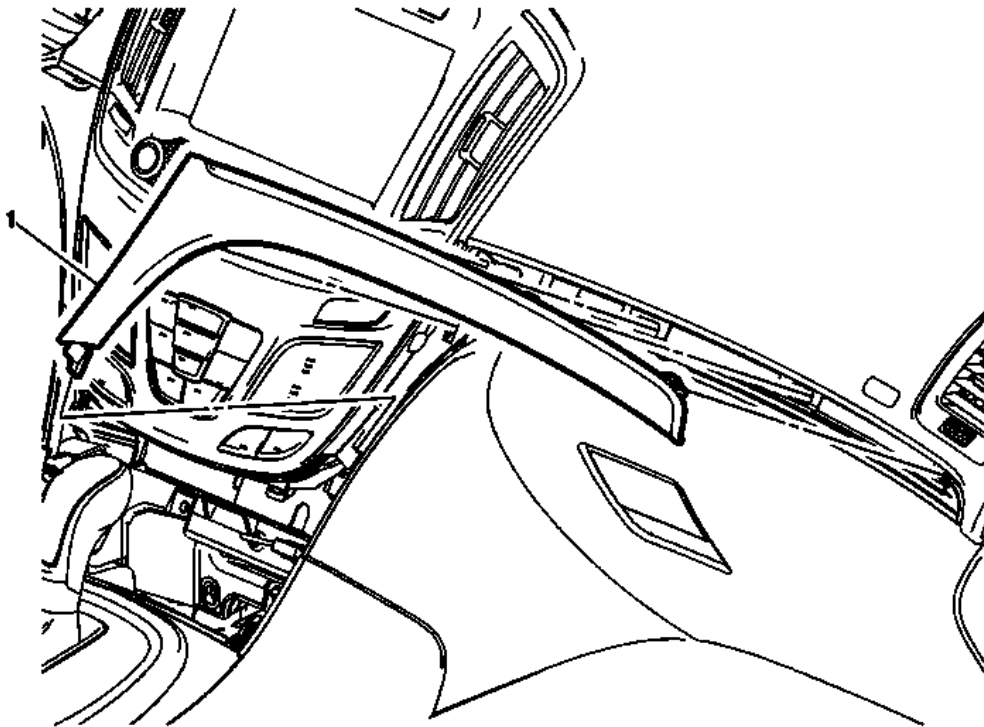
Instrument Panel Center Upper Molding (Passenger Side)
